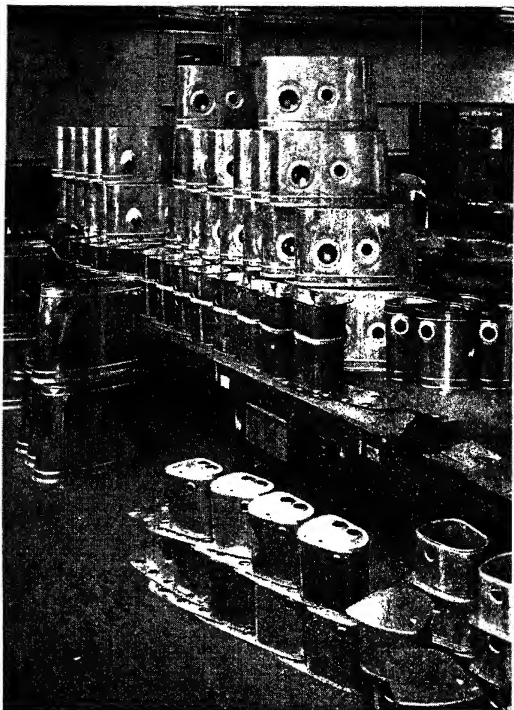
SHOWING VARIOUS PART FINISHED ASSEMBLIES.
